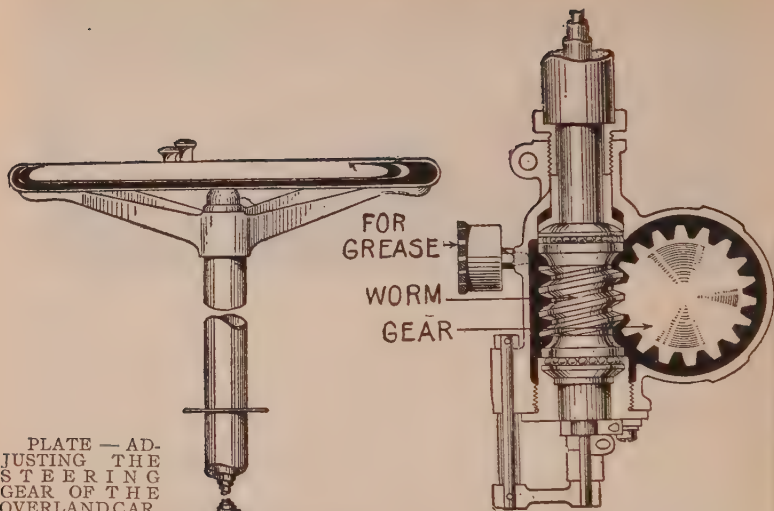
PLATE — ADJUSTING THE STEERING GEAR OF THE OVERLAND CAR.
